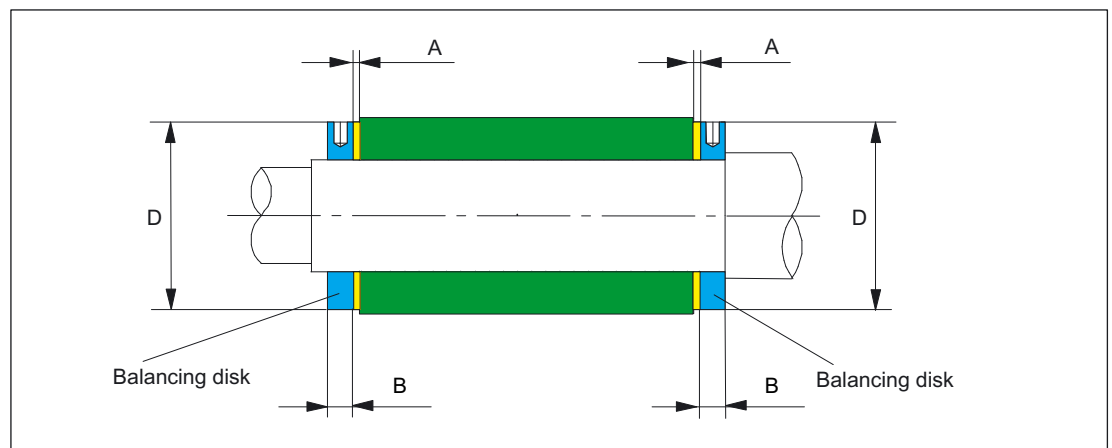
Recommended balancing disks for rotors without sleeve; dimensions A, B and D, refer to the following table
